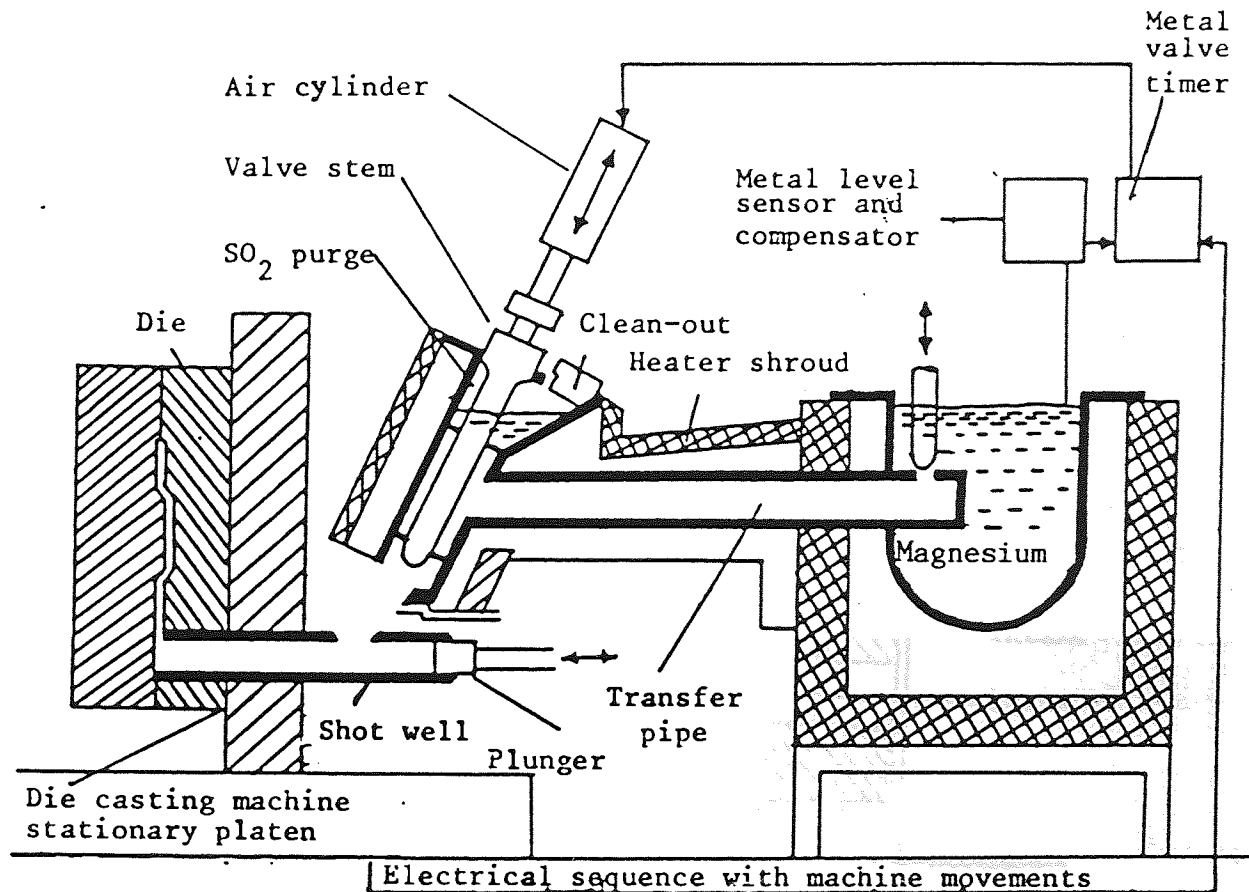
A conventional horizontal cold chamber casting machine with an automatic metering device<sup>(24)</sup>.
